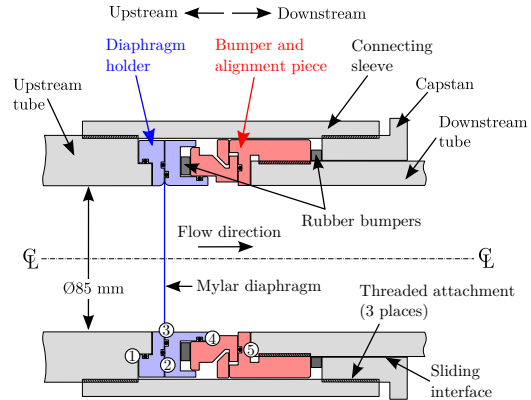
Schematic of X2 diaphragm buffer/holder assembly.
